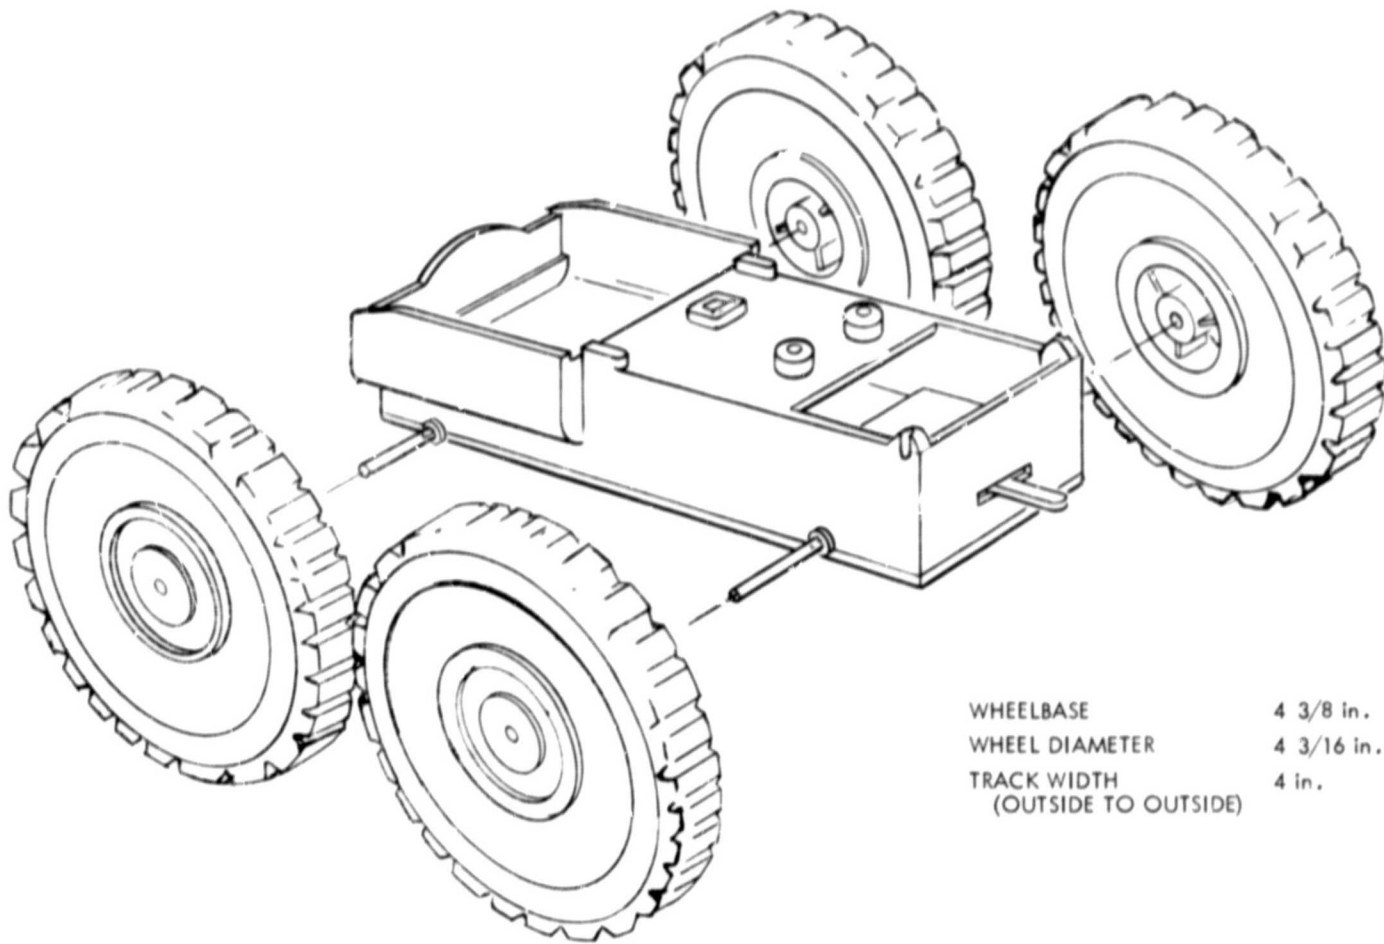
Three-Quarter Exploded View of Model Vehicle with Dimensions
